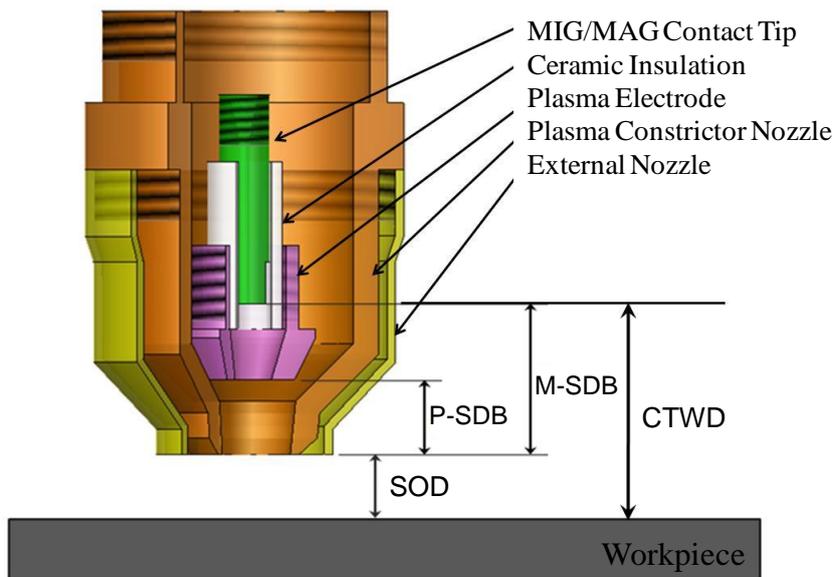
Schematic view of the main elements of the Plasma-MIG torch (SOD = standoff distance; P-SBD = plasma electrode set back distance; M-SBD = MIG/MAG electrode set back distance; and CTWD = contact tip-to-workpiece distance)
